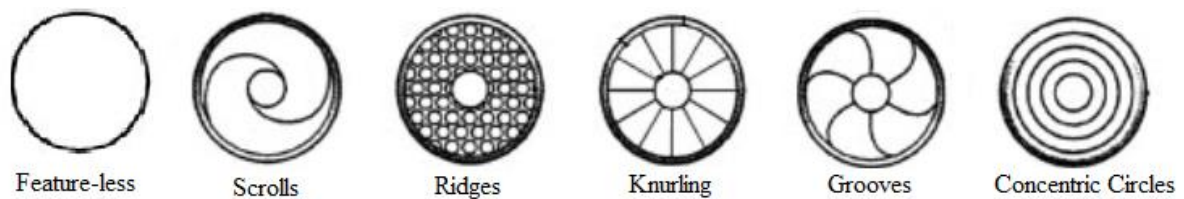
Common Friction Stir Welding Shoulder Features
